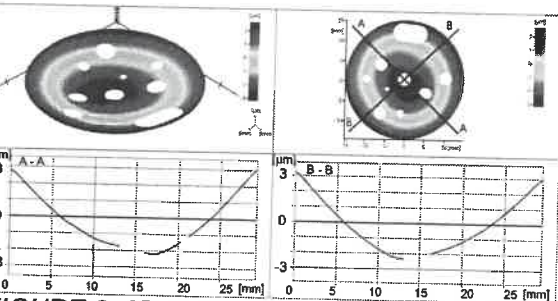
3D shape and profile of an identified cross section on the bottom surface of the plate.
